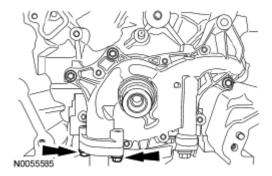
Locating Crankshaft Timing Chain Sprocket Courtesy of FORD MOTOR CO.
